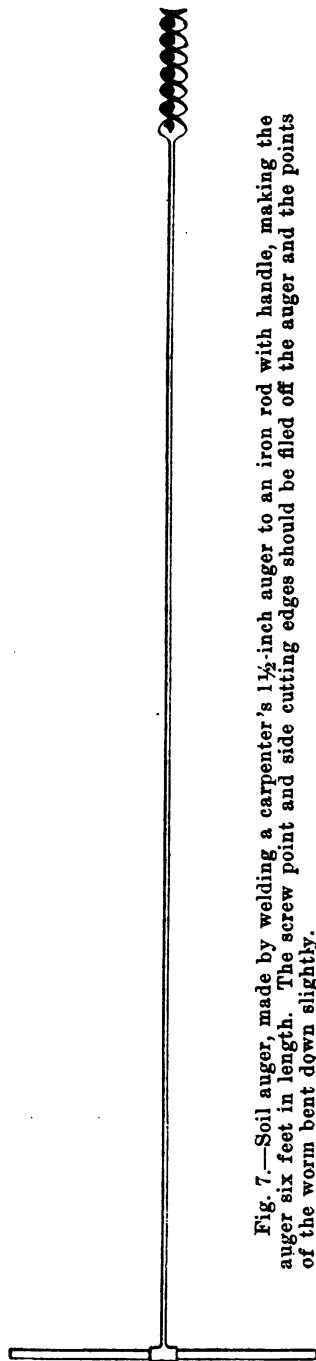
Soil auger, made by welding a carpenter's 1½-inch auger to an iron rod with handle, making the auger six feet in length. The screw point and side cutting edges should be filed off the auger and the points of the worm bent down slightly.
